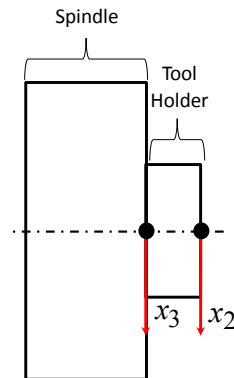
Machine-holder assembly experimental model used in the proposed coupling methods.
